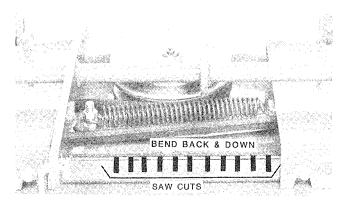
Cut and Bend Support Plate (48 in. Mower)
